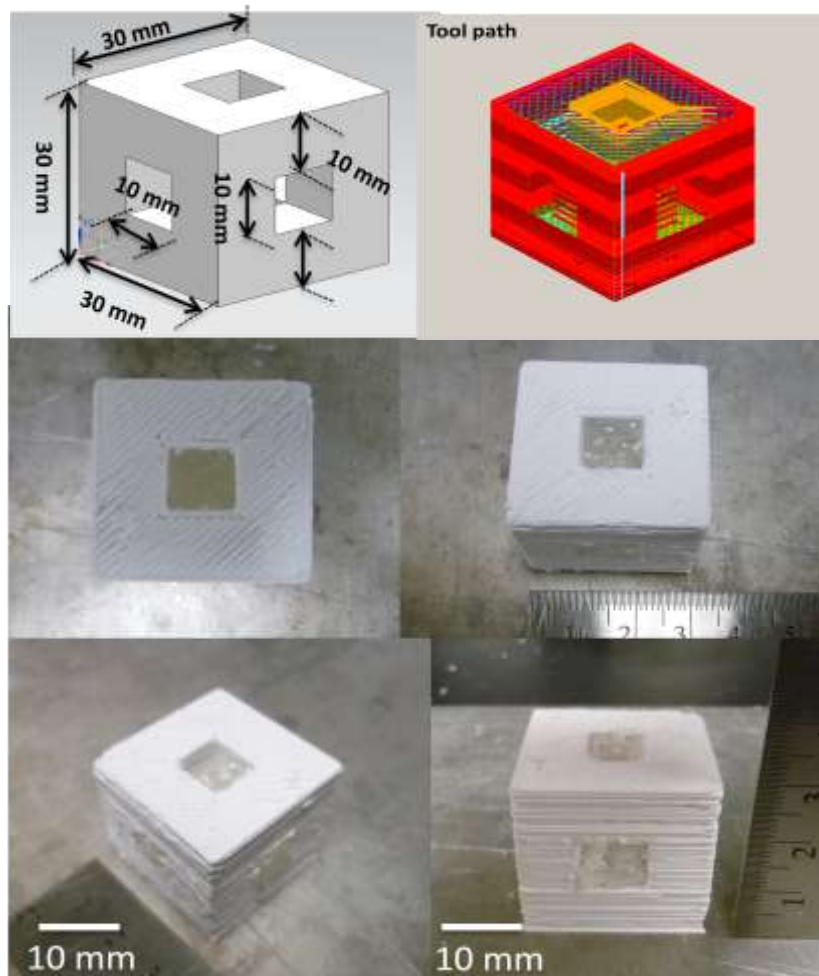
CAD model of a cube with square holes in each side and the extruded part with support material
